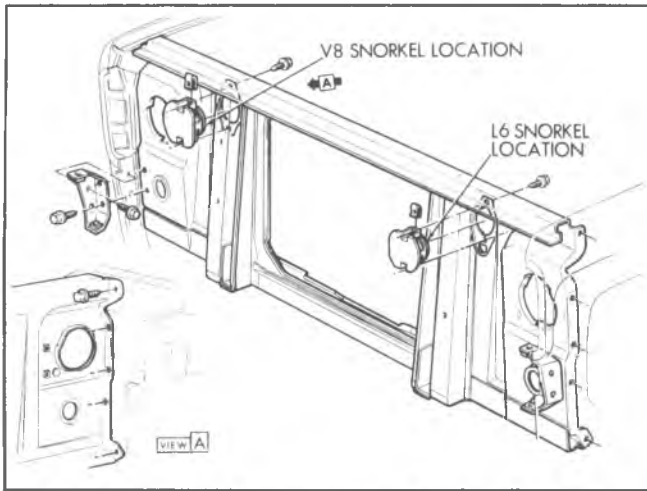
Carburetor Outside Air Inlet Snorkels--CK Series
